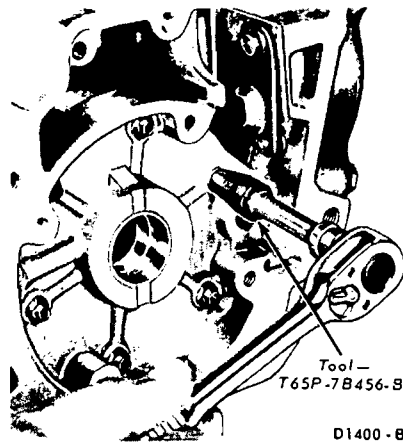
Removing One-Way Clutch Outer Race Attaching Bolts
